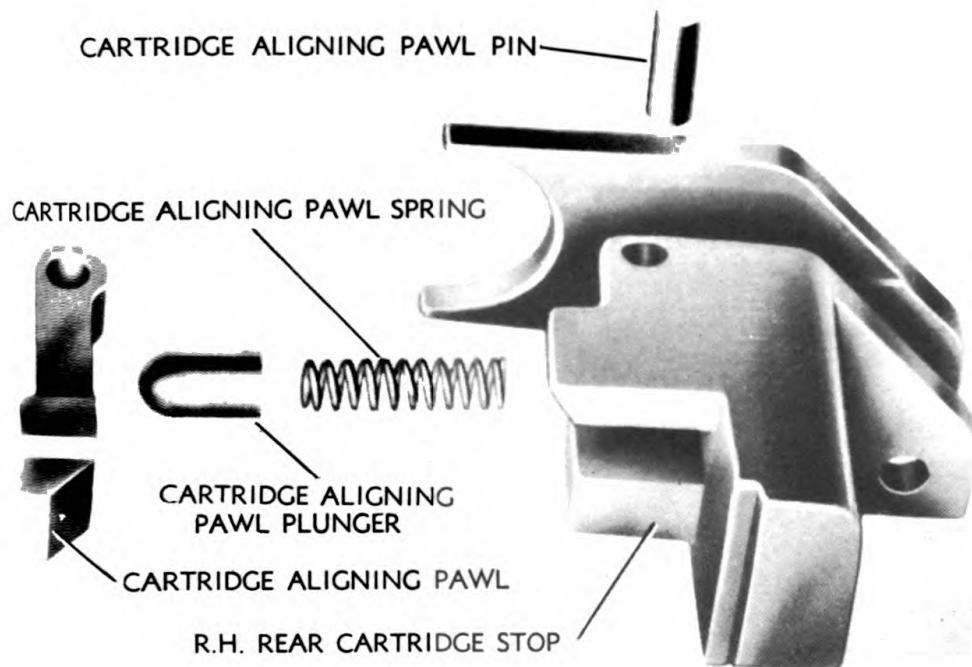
Right-hand Rear Cartridge Stop Assembly — Exploded View
